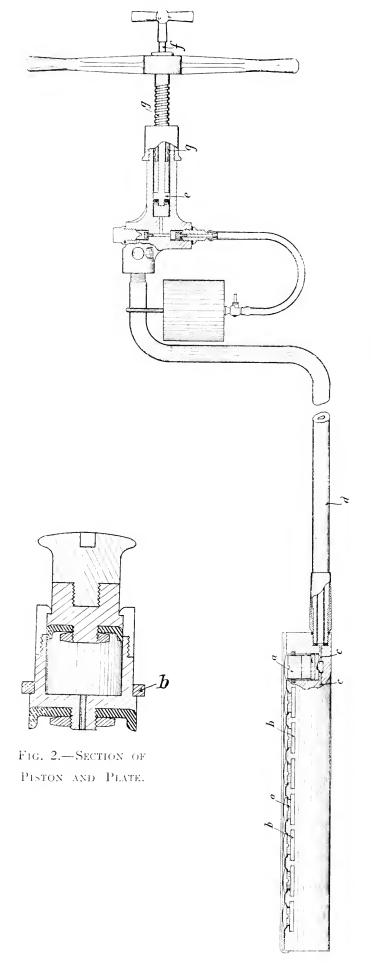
SECTIONAL ELEVATION OF THE HYDRAULIC MINING CARTRIDGE.
